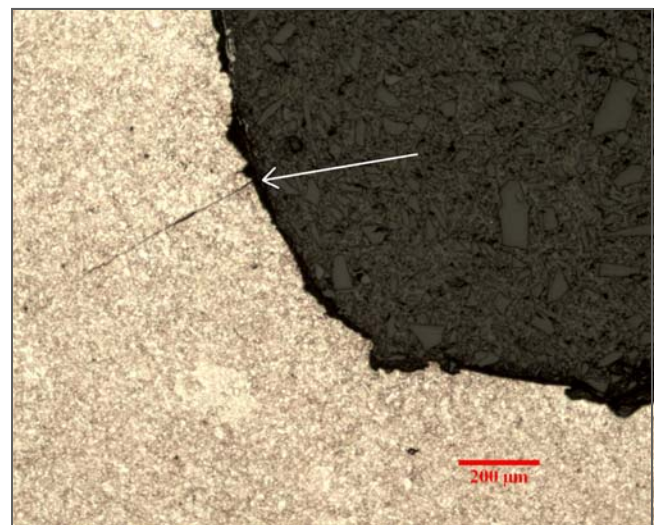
Photomicrograph of a Fatigue Crack at the Bolt Head-to-Shank Radius
